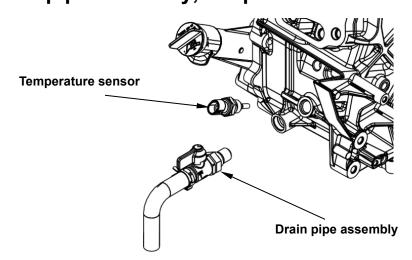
DRAIN PIPE ASSEMBLY, TEMPERATURE SENSOR
